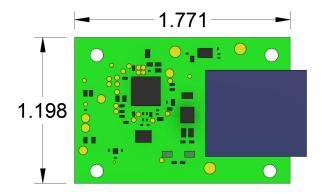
Automotive Ethernet PHY Add-on Board Dimensions
